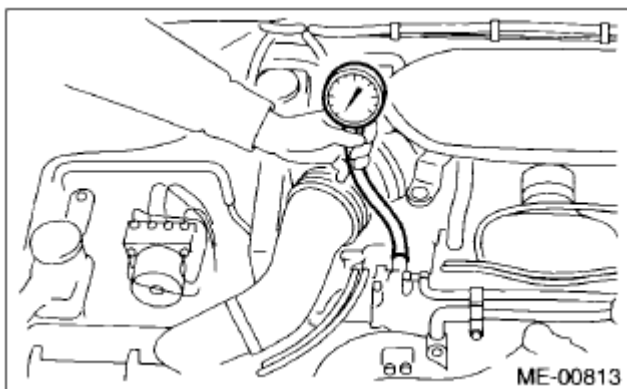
Installing Vacuum Gauge Into Intake Manifold
